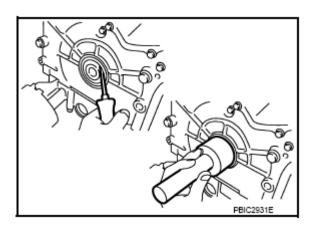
Removing/Installing Front Oil Seal Using Suitable Tool Courtesy of NISSAN NORTH AMERICA, INC.
